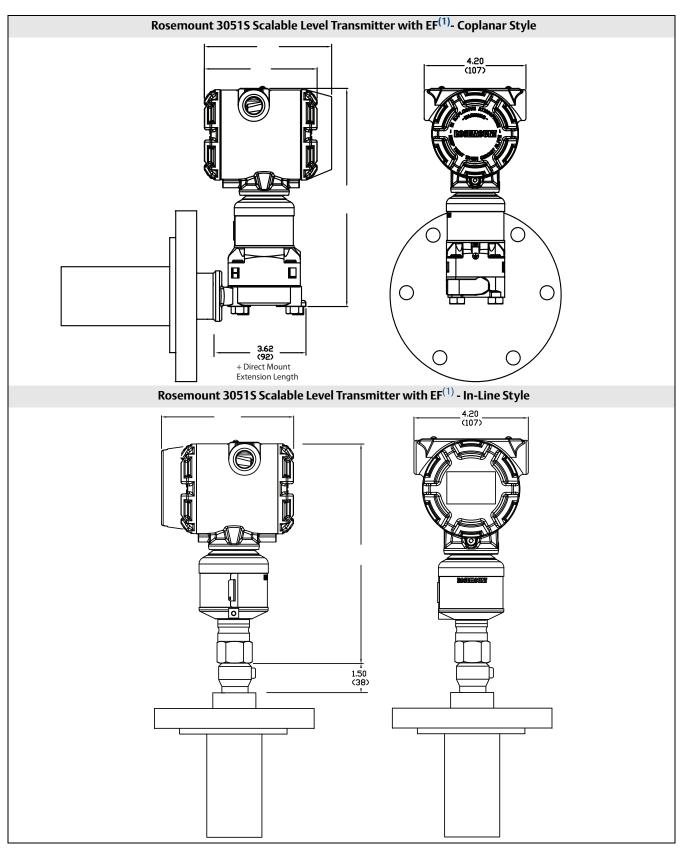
Rosemount 3051S Scalable Level Transmitter with EF Seal (Measurement in inches (millimeters))
